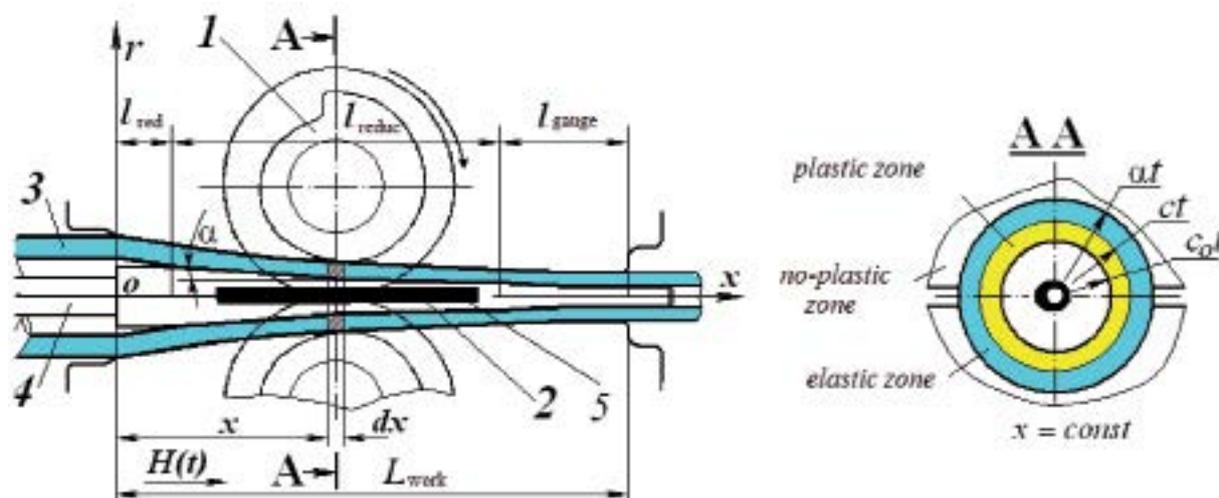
The calculation scheme of dynamic processes in the roll pass when cold rolling on the CRM mill: 1 - working rolls; 2 - mandrel; 3 - hollow billet; 4 - draw bar; 5 - high-speed vibrator
